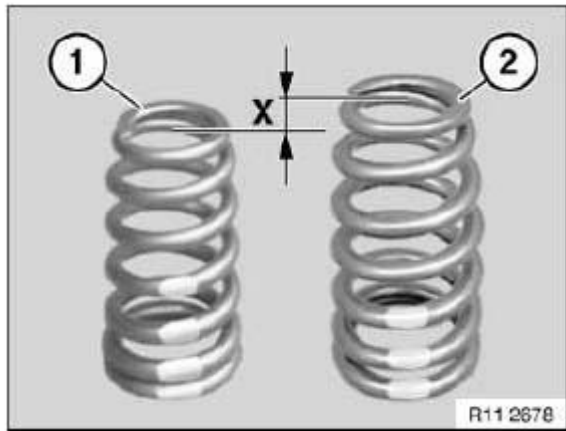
Identifying Valve Springs Of Inlet Valves And Exhaust Valves
